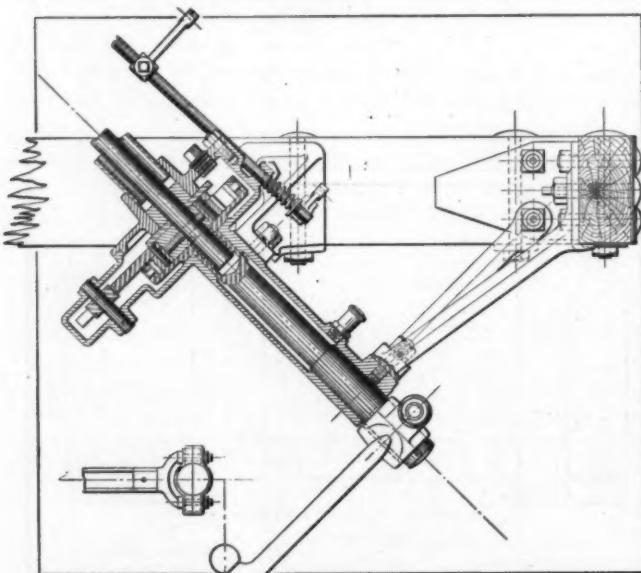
Steering gear, having a 6 : 1 ratio, long bearings, and strong support to frame
